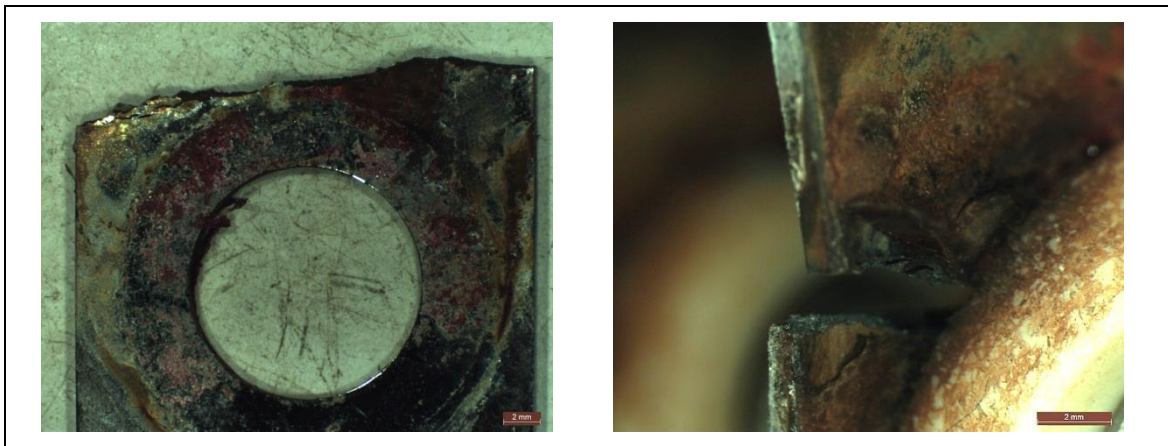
Batch 2 U-bend specimens showing locations of cracks. (Left) S430 specimen (Right) S450 specimen.
